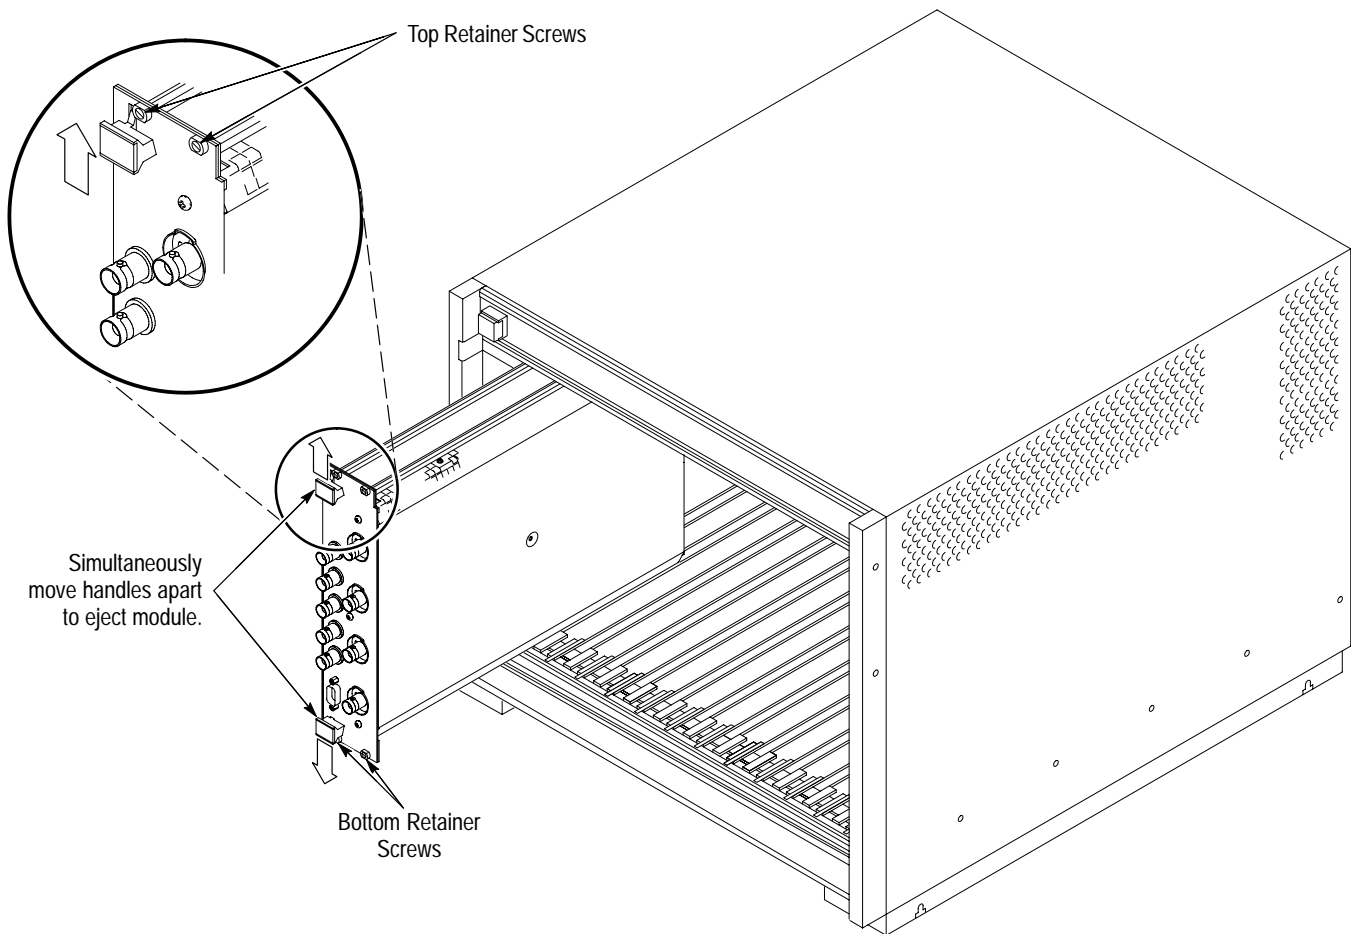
Module Retainer Screws and Ejector Mechanism
